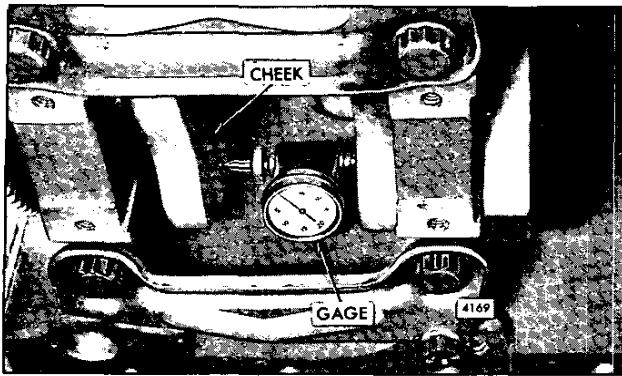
Crankshaft Distortion Measuring Gage Mounted on Crankshaft
